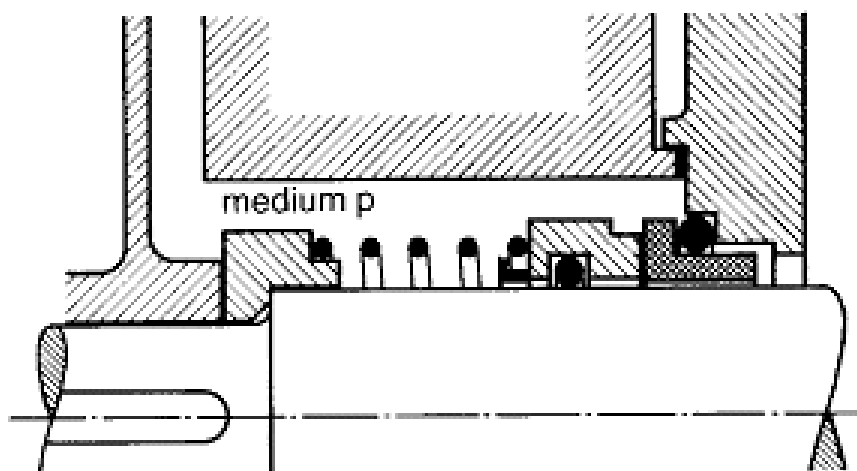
The sealing principle of a single action sliding ring with carbon ring
